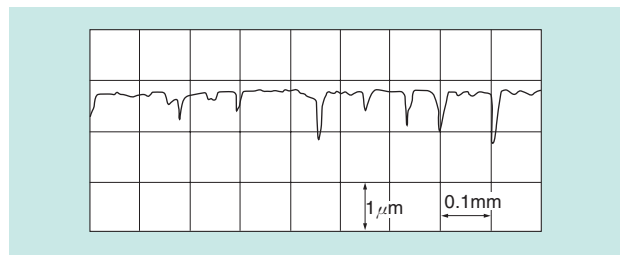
Cross-sectional view of roller surface track with finer dimples
